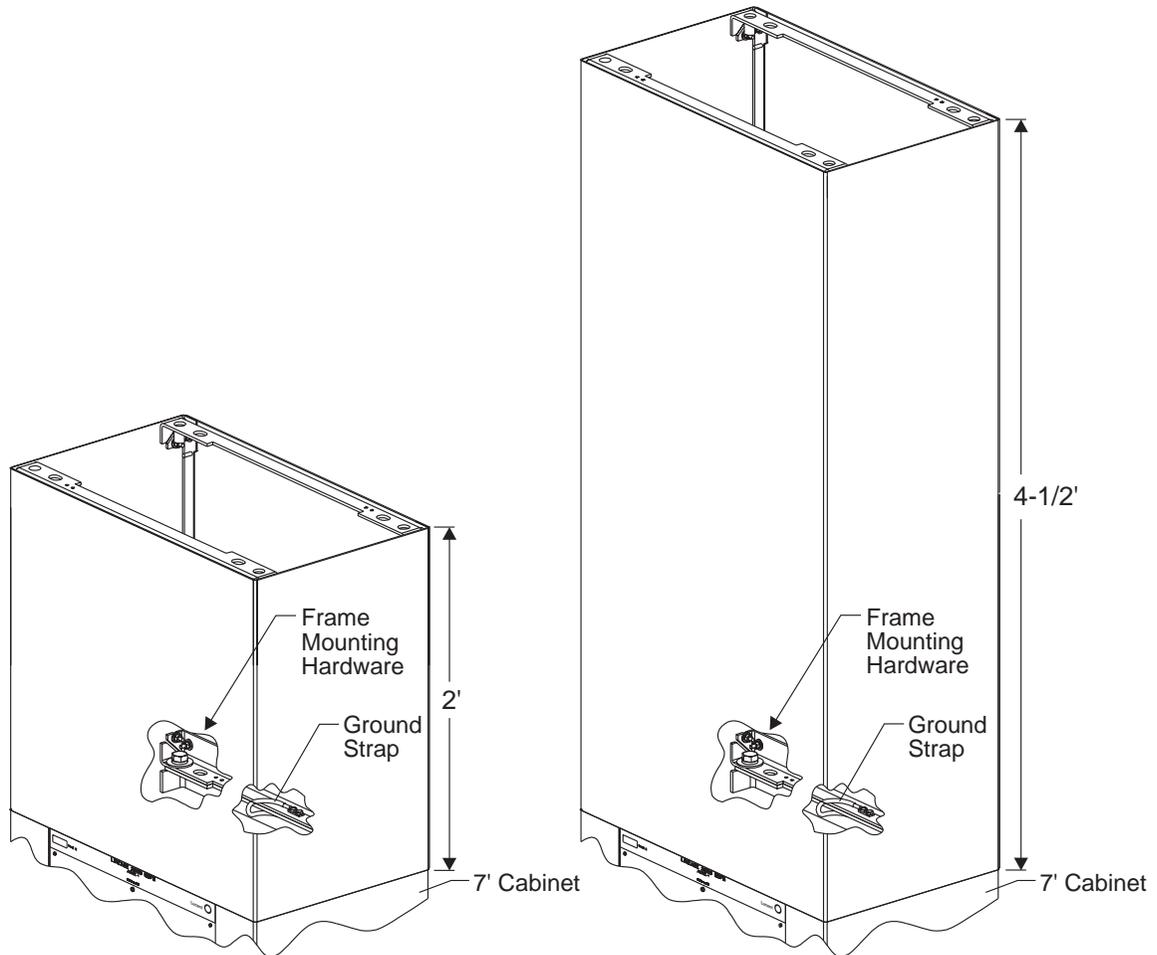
2-Foot or 4-1/2-Foot Extension Cabinet
